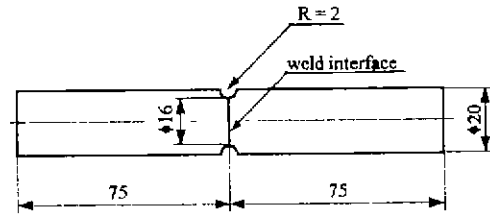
Specimen for tensile test of friction-welded interface
